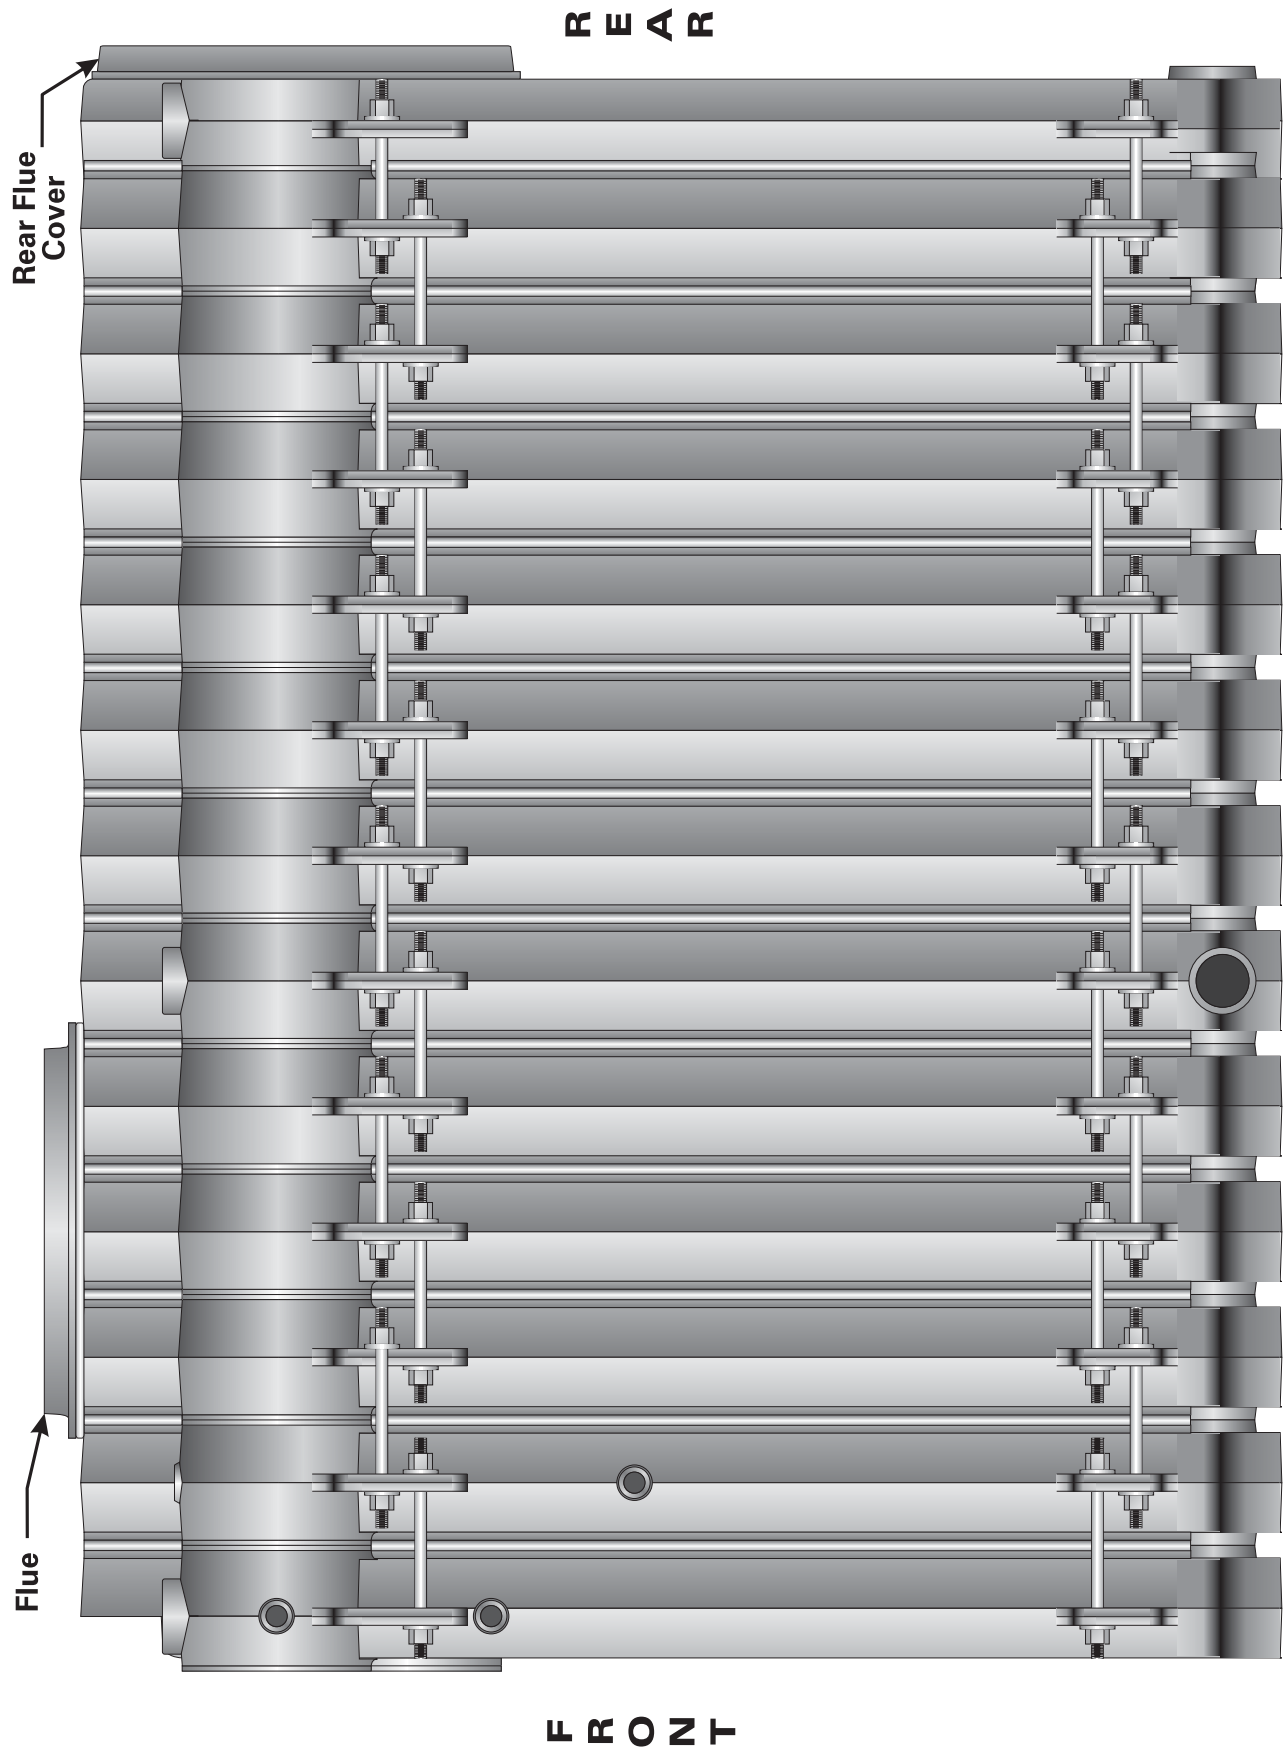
Series LCE Boiler Assembly – Right Side View
